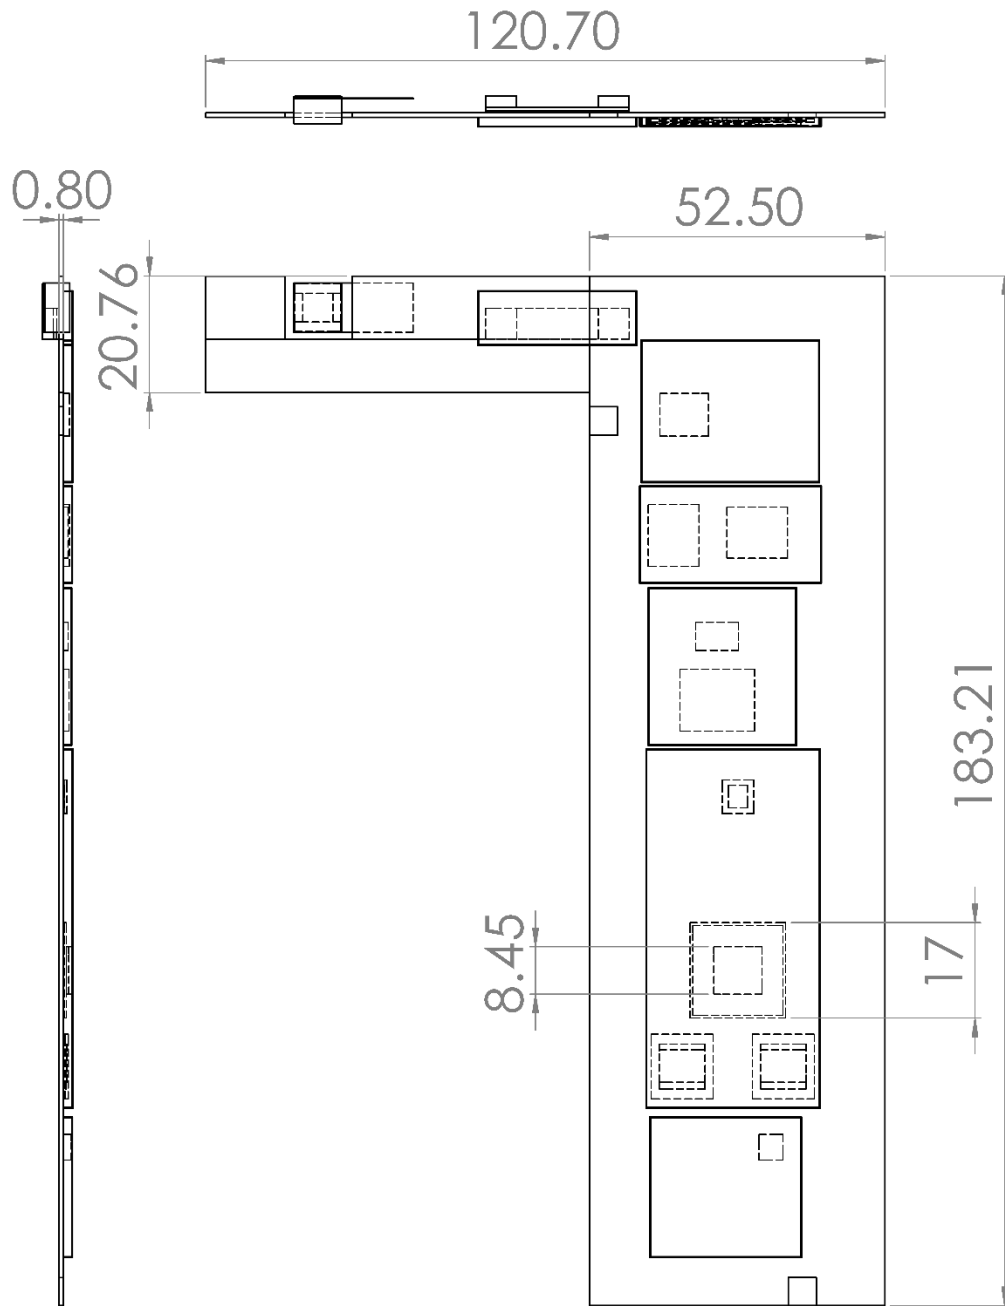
Dimensioned drawing of the PCB, dimensions given in mm
